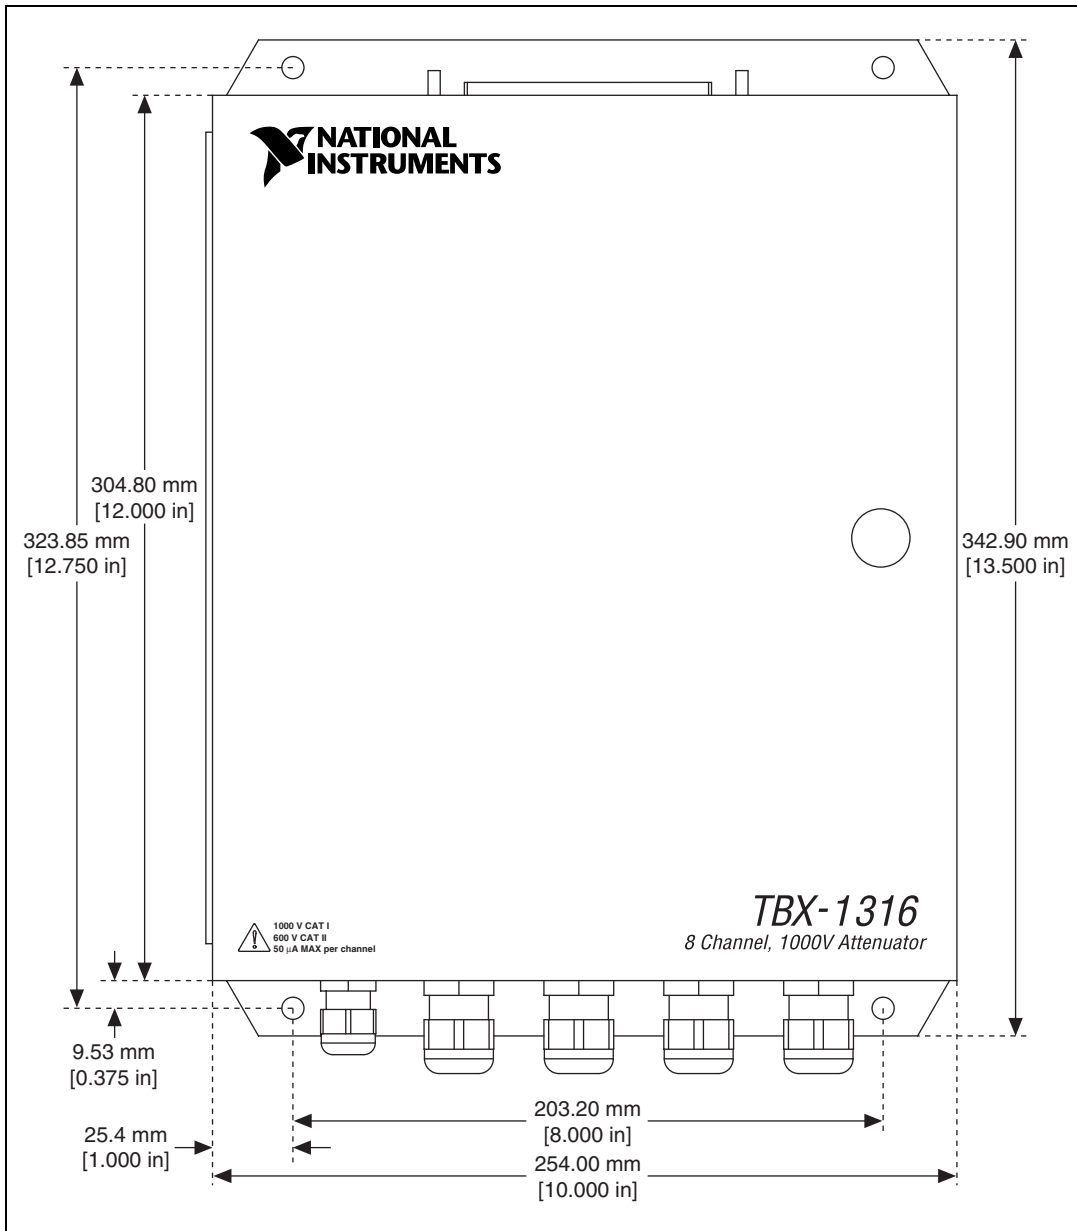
TBX-1316 Enclosure Mounting Hole Spacing
